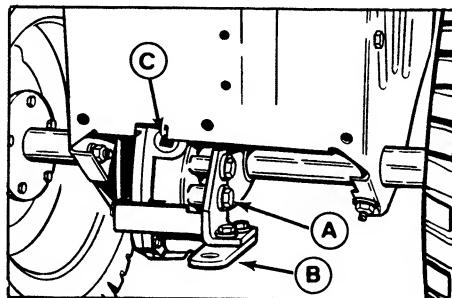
Transmission Oil Level Check (Drawbar Removed)
